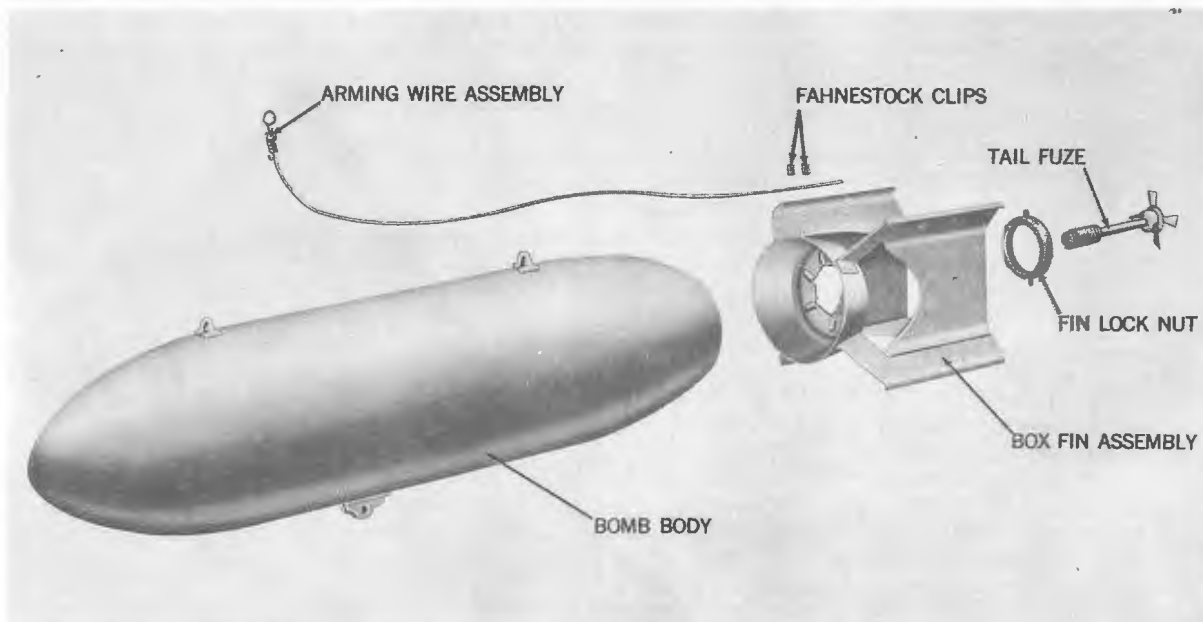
2000-lb SAP Bomb M103, Exploded View.
